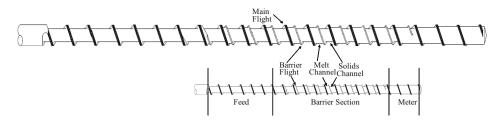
Schematic for a barrier melting section (courtesy of G. A. Campbell and M. A. Spalding, *Analyzing and Troubleshooting Single-Screw Extruders*, 2nd ed., Hanser (2021))
